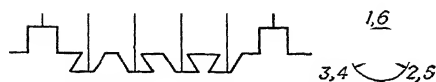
Usual crank-arm arrangement for six-cylinder in-line engines.
